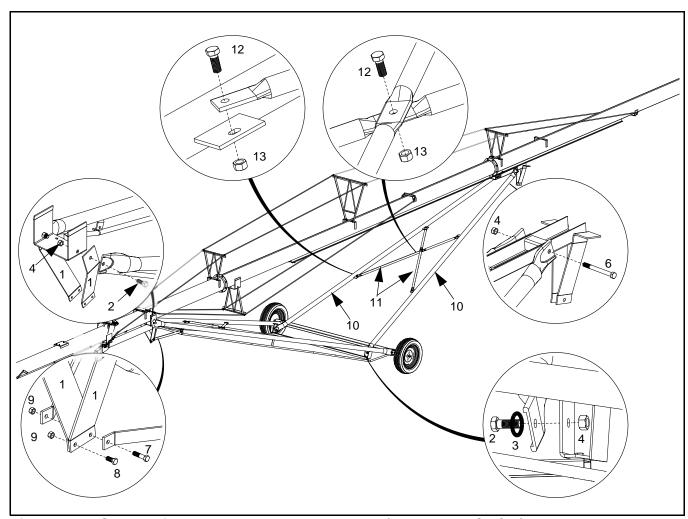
Connecting the Auger Tube to Frame (MKX100-53/63/73)
